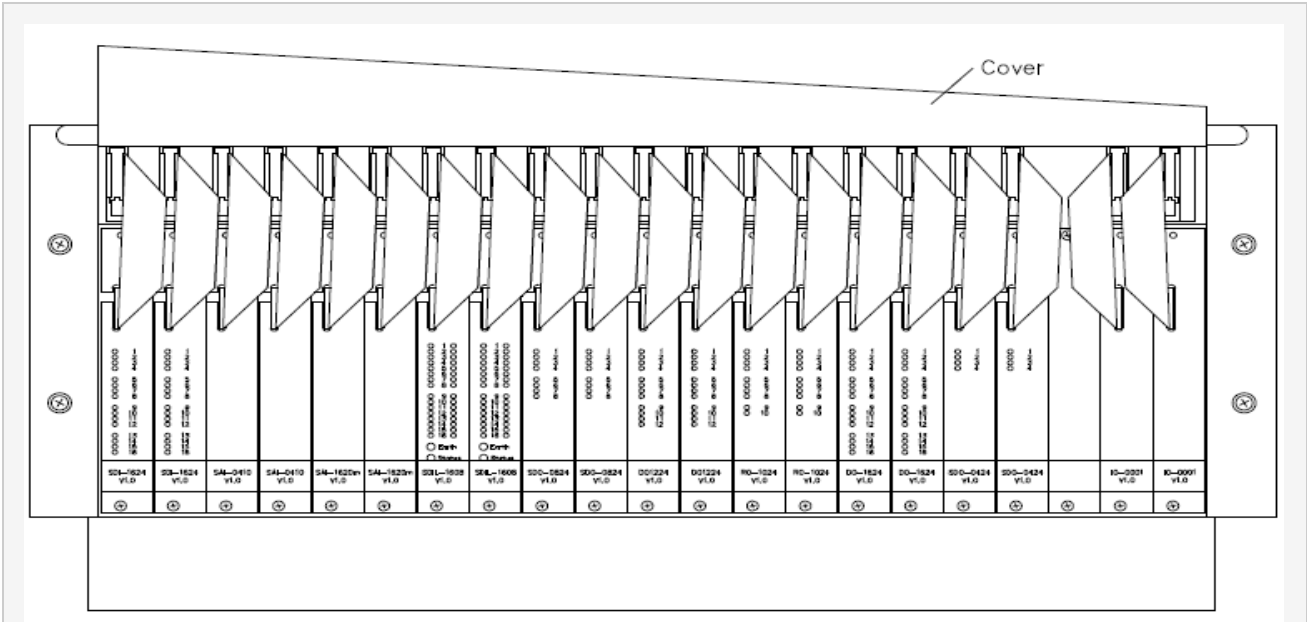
Front view of a filled, open IOCHAS-0001R
